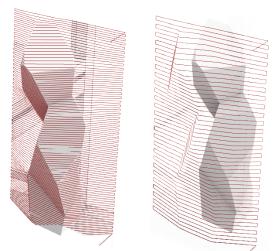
Precise tool path(left) near the component, and loose tool path(right) to remove excessive foam
